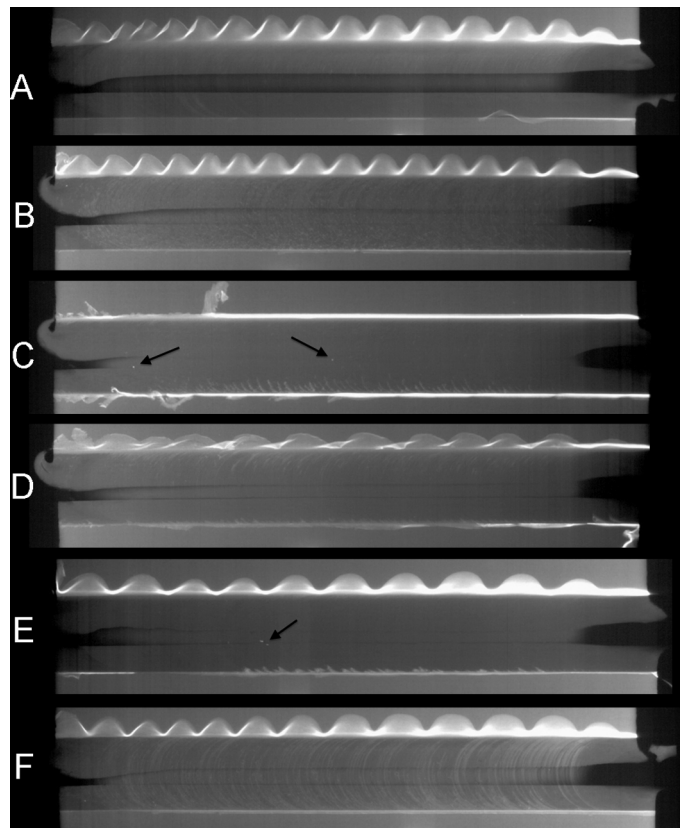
Top surfaces of experimental welds. Note the degree of galling and flash present. Samples C and E appear to have the best surface finish. Sample C has minimal flash.
